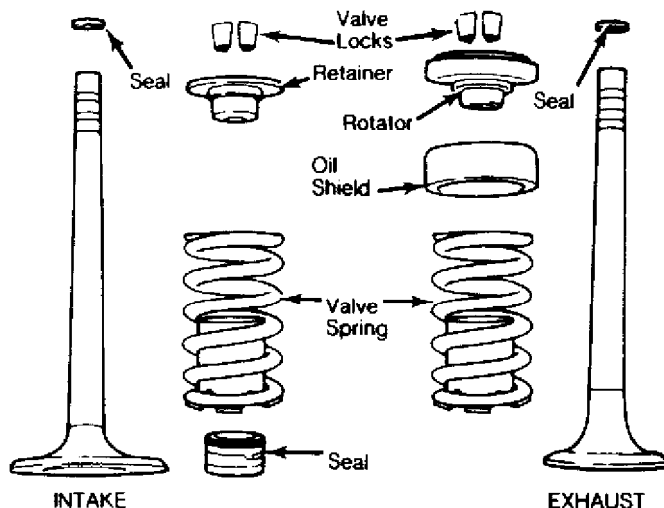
Exploded View of Intake & Exhaust Valve Assemblies - Typical
